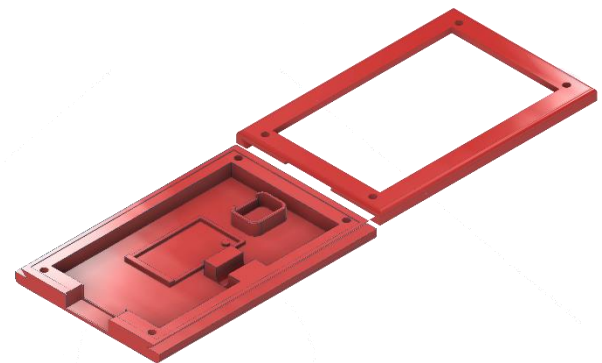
CAD sketch of 3D printable SAMS Sensor case
